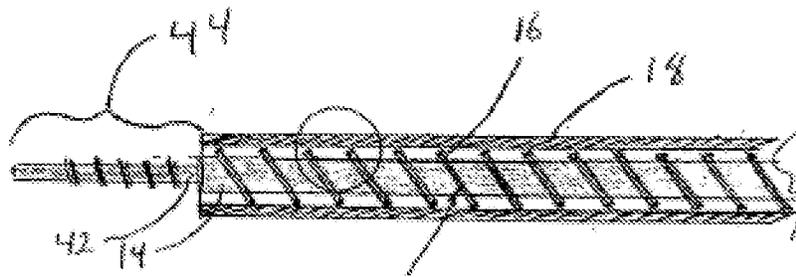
C shows a partial cross-section of a lead embodiment “prior to fusing the outer insulator to the inner insulator.” Wessman ¶ 18.
